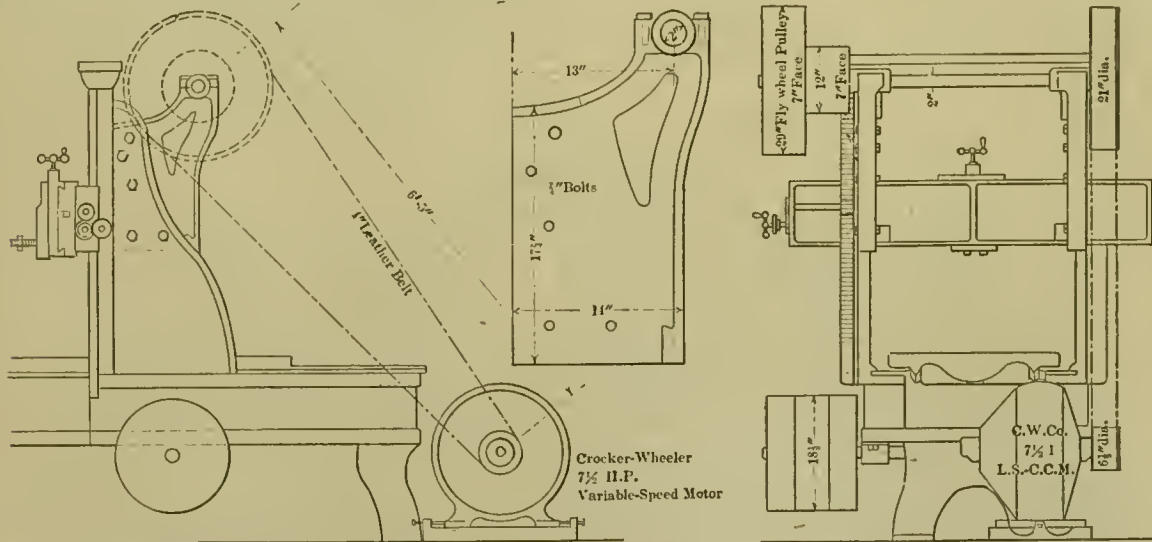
DETAILS OF THE BELTED MOTOR-DRIVE THAT WAS APPLIED TO THE NEW HAVEN PLANER, SHOWING STYLE OF COUNTERSHAFT SUPPORTING BRACKET USED.
